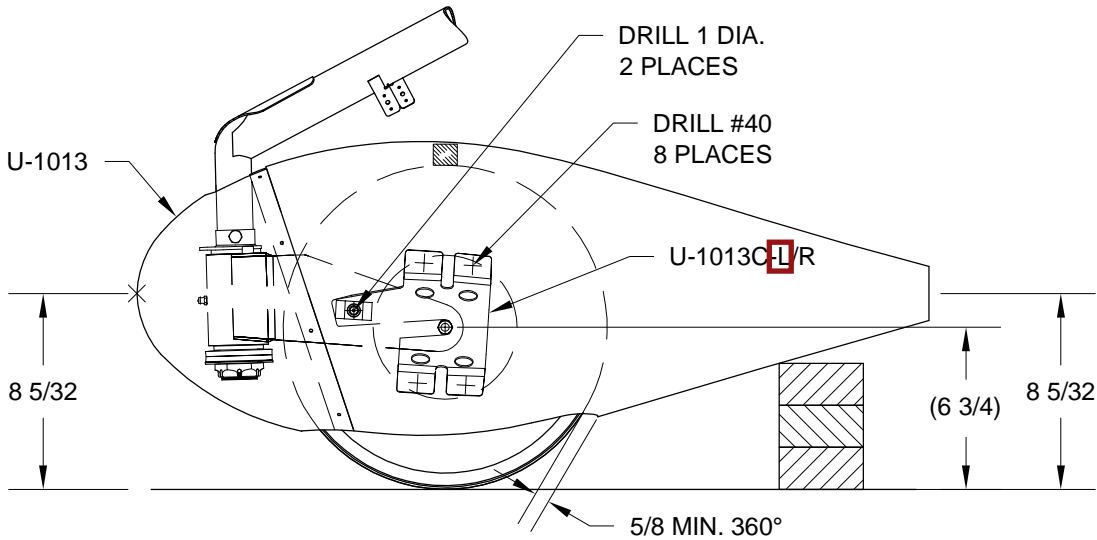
ALIGNING THE WHEEL FAIRING REAR
